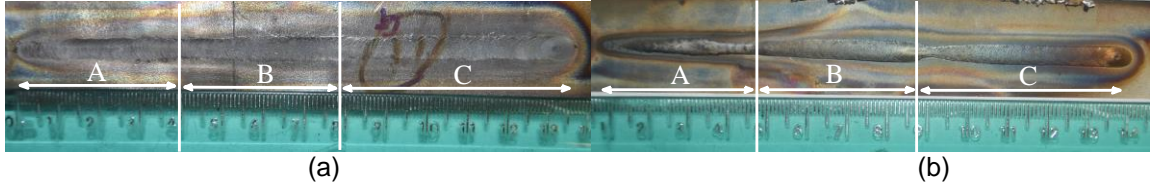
Front-side and backside weld bead appearances for current disturbance experiment. (a) Front-side weld bead; (b) back-side weld bead.
